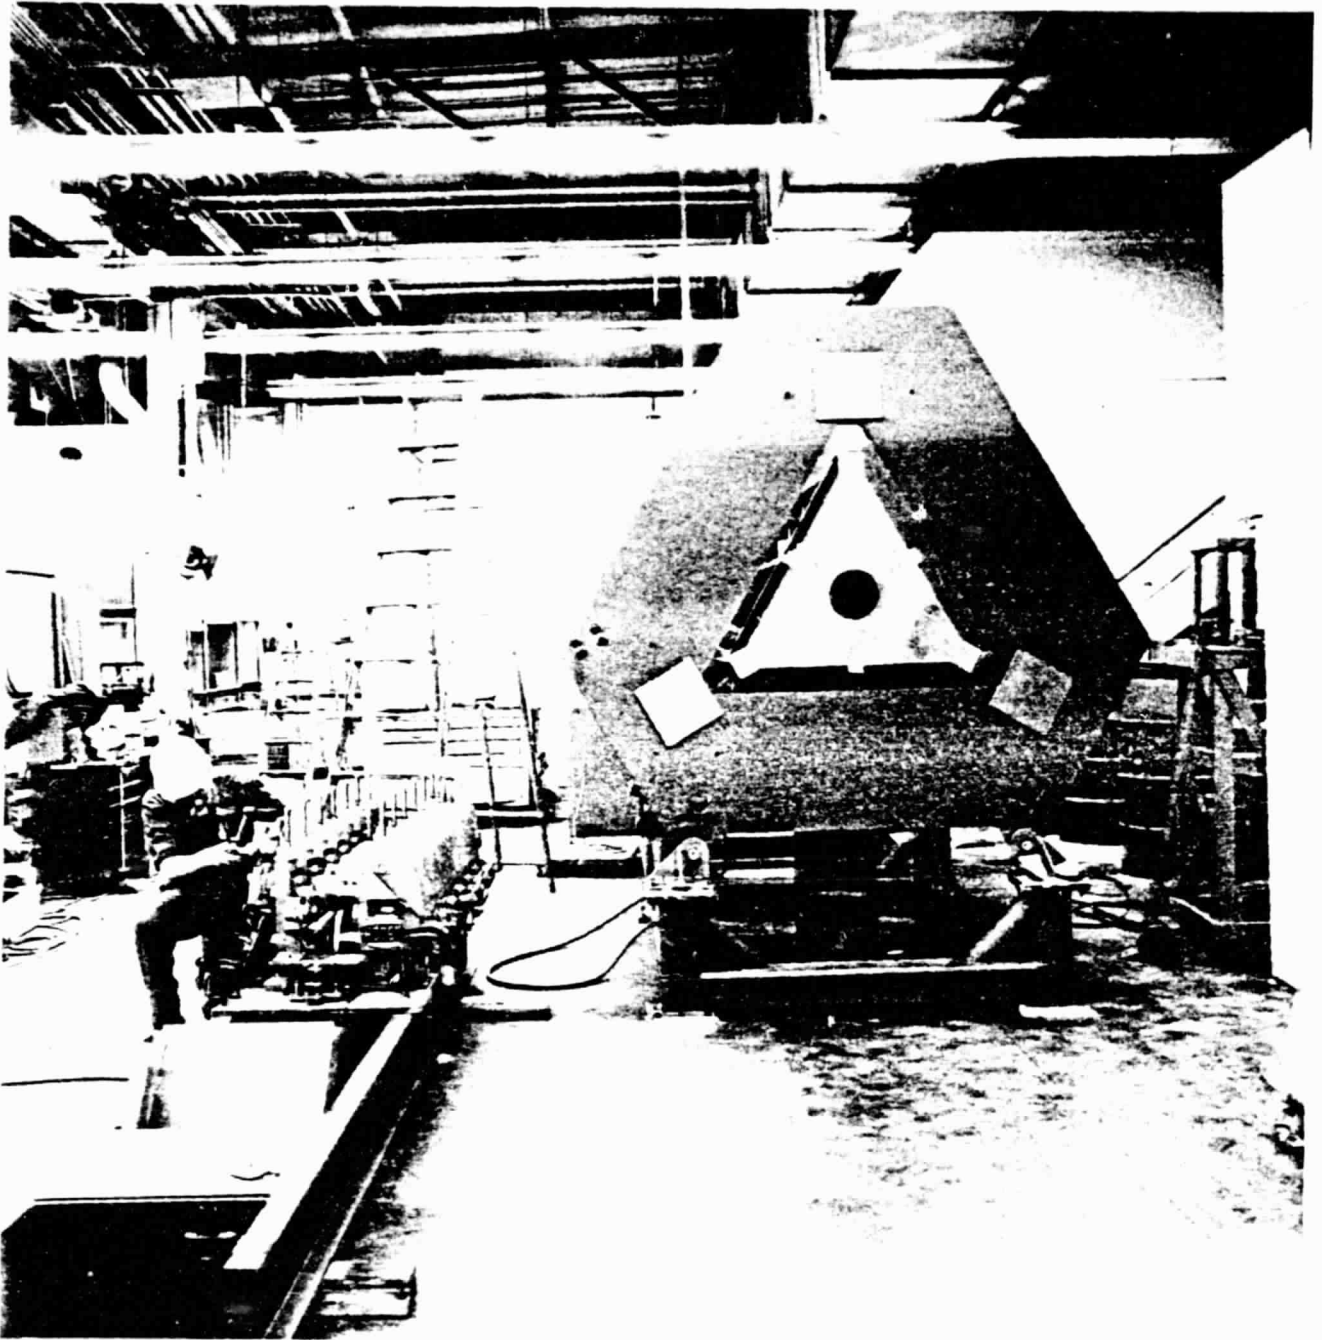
Yoder Mill No. 3 Mounted On Box Beam
